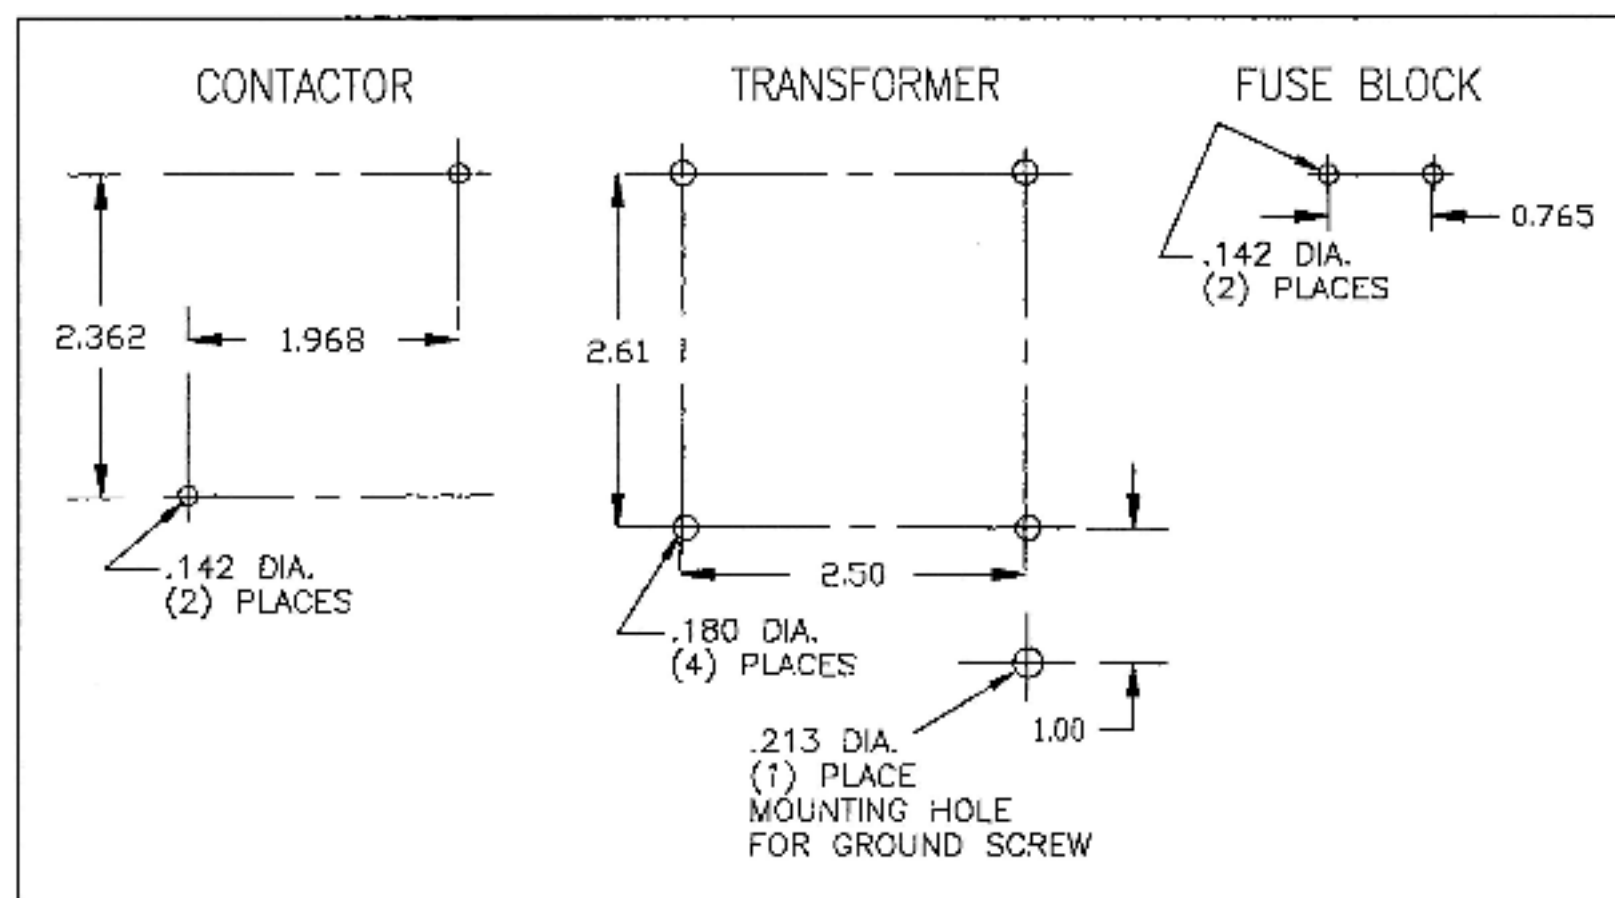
Contactor, Transformer, and Fuse Block Mounting Hole Dimensions.
